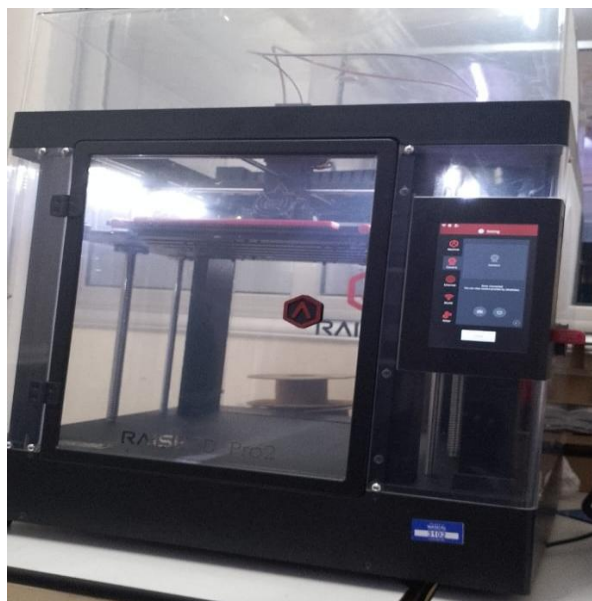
3D Printing Hold box in WASCAL Competence Center
